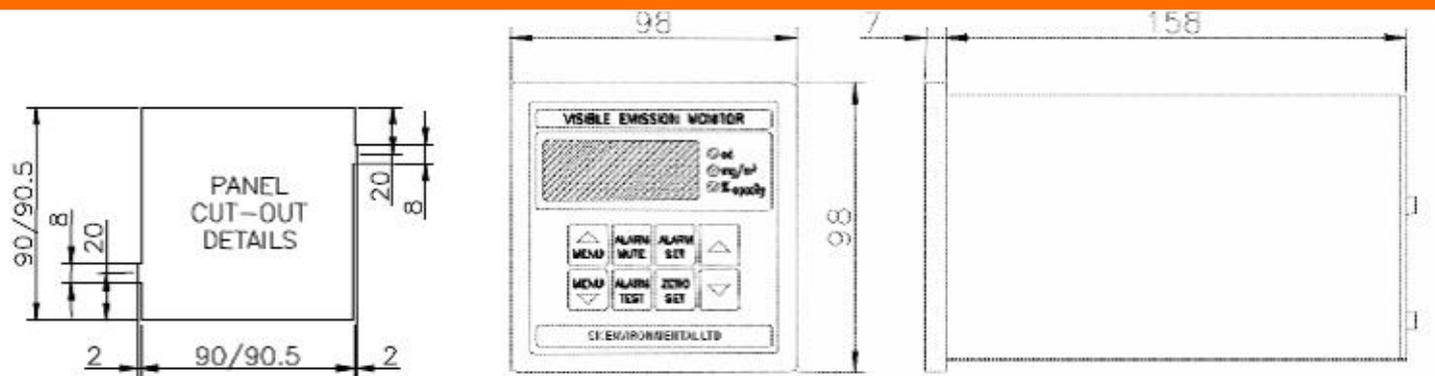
PANEL-UNIT AND CUTOUT DIMENSIONS
